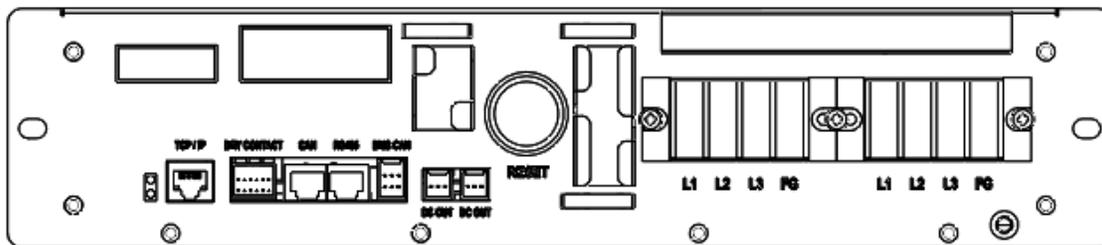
Front View of SMPS Assembly Type A, 3-Phase AC Input
